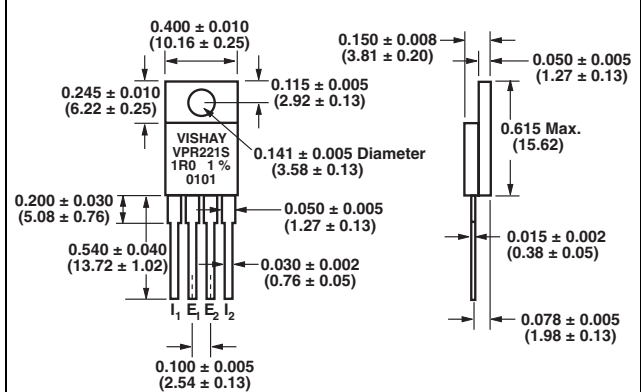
VPR220S AND VPR221S FORMING DIMENSIONS in inches (millimeters)
